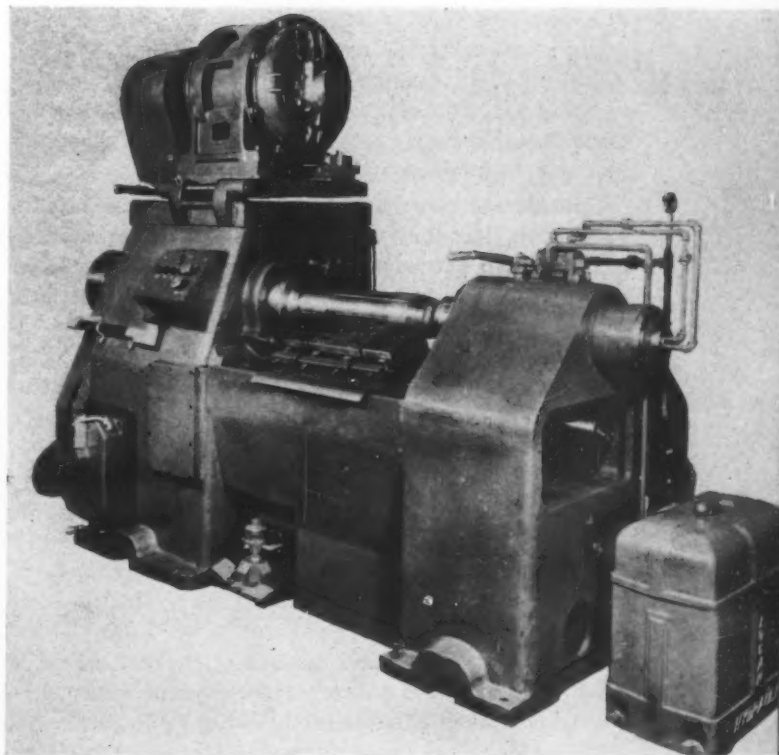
Six of these shell lathes, each incorporating minor modifications depending upon the machining operation, form an assembly line which produces finished shells at high rate of speed from forged blanks
